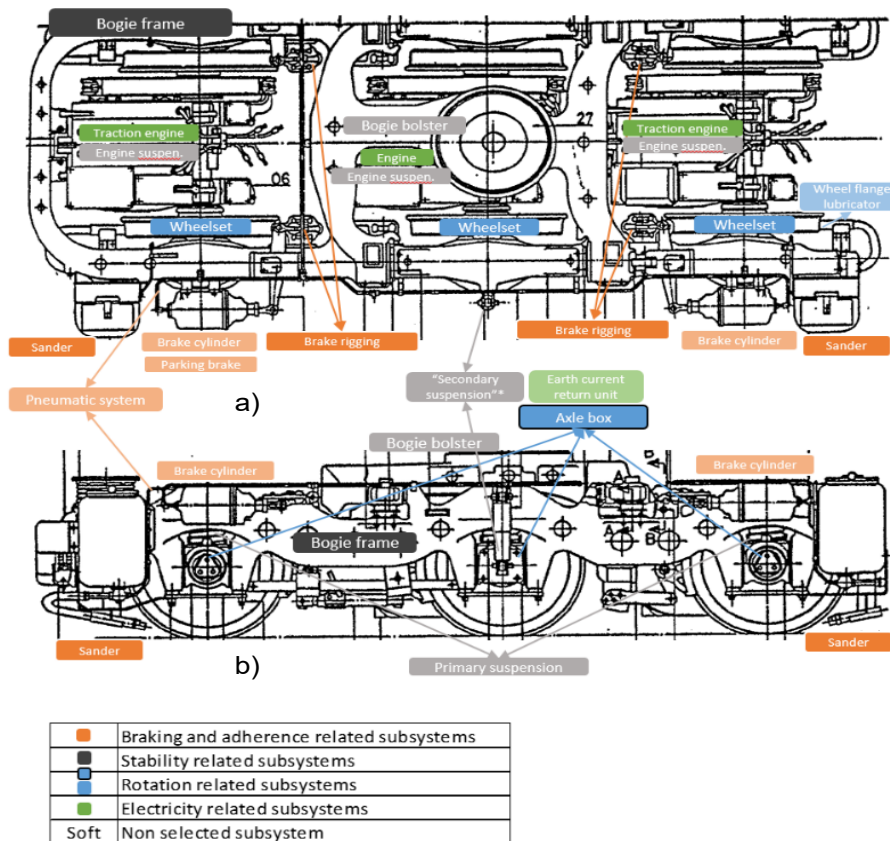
Subsystem identification and Bogie drawings a) Top View and b) Side View [73]
